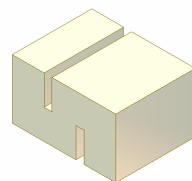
Shear Specimen Preparation – Specimens Cut to Length from Strip
